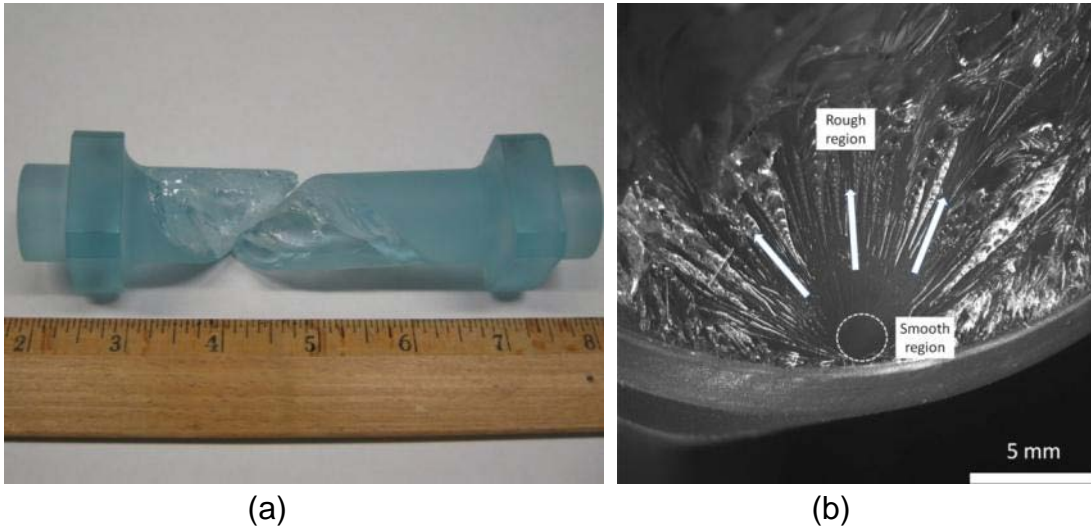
Pictures showing (a) the fractured MFG-1 sample, and (b) its fracture surface.
